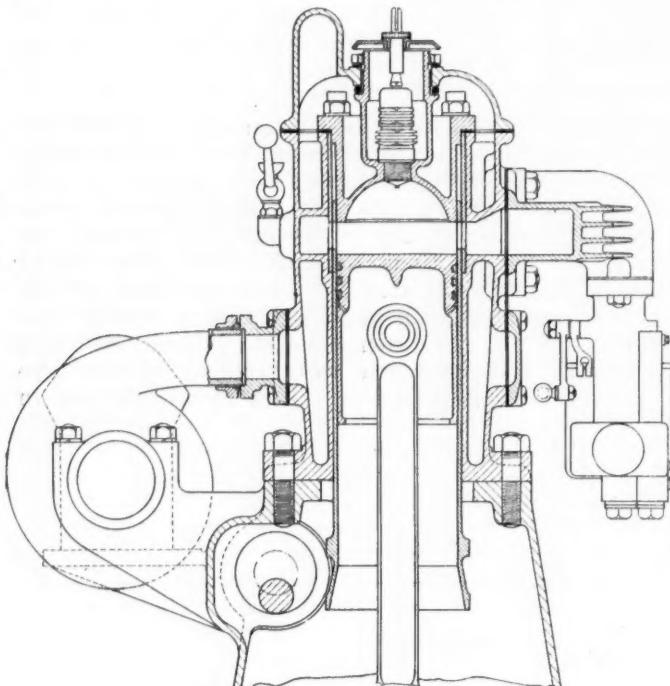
Sectional view of an 80 x 130 m.m. engine embodying the Wallace valve
